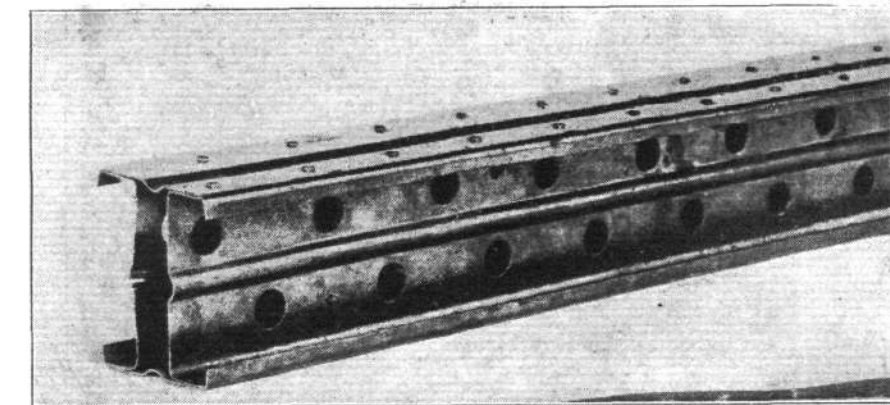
and 22 show another method of attaching the fittings which is self-explanatory. The specimen has been tested to destruction and shows the failure of the flange in the centre.
